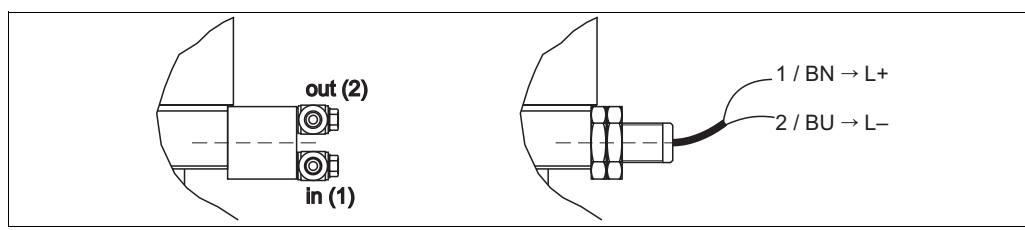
Limit position switches, left: pneumatic (1 = compressed air inlet, 2 = compressed air outlet)
